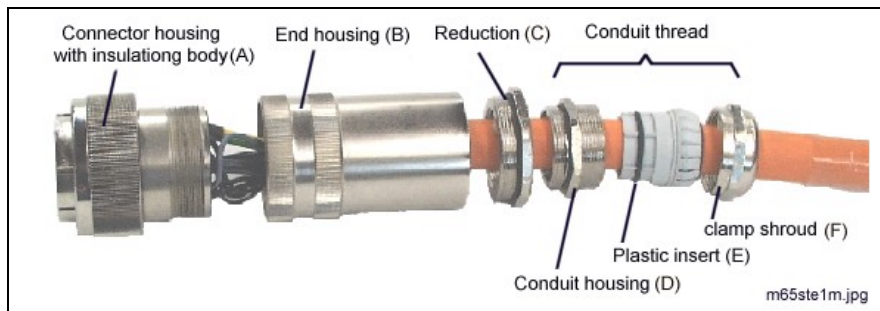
Individual parts of connector INS0381, -0382, -0386
